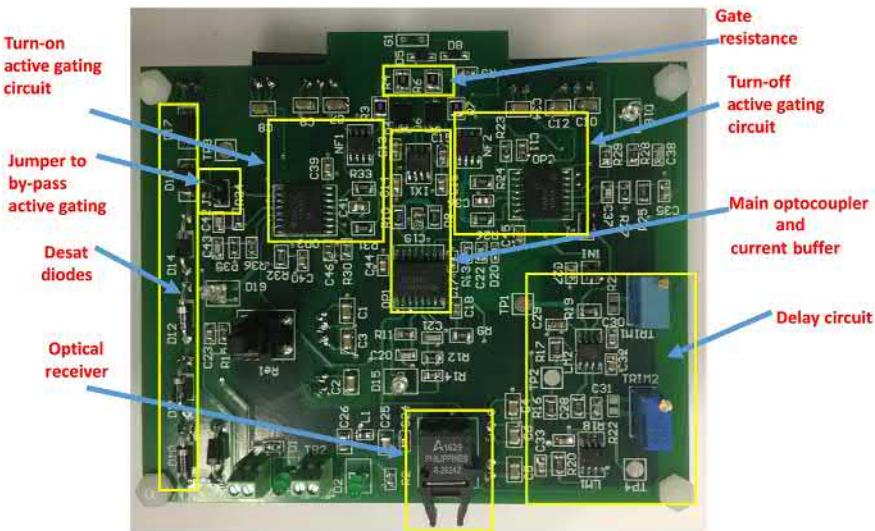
Active gate driver PCB. *PCB*, printed circuit board.
